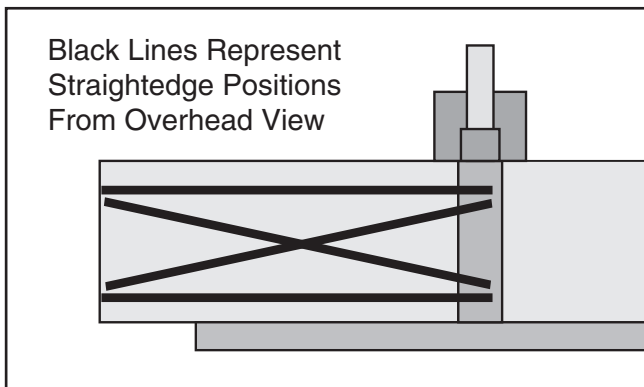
Straightedge positions for verifying outfeed table parallelism.
